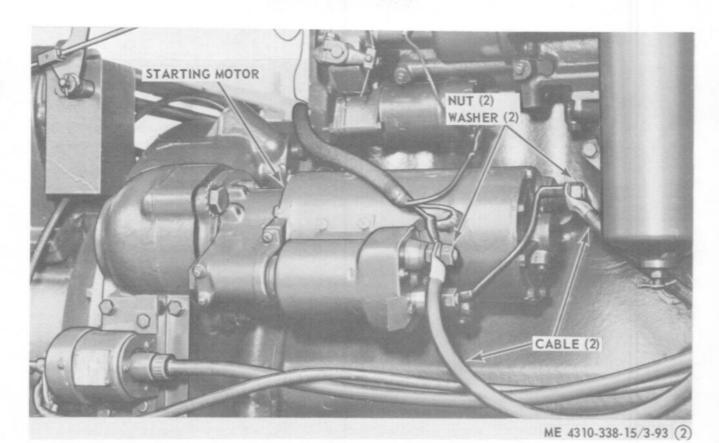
Batteries and cables; removal and installation (sheet 2 of 2).
